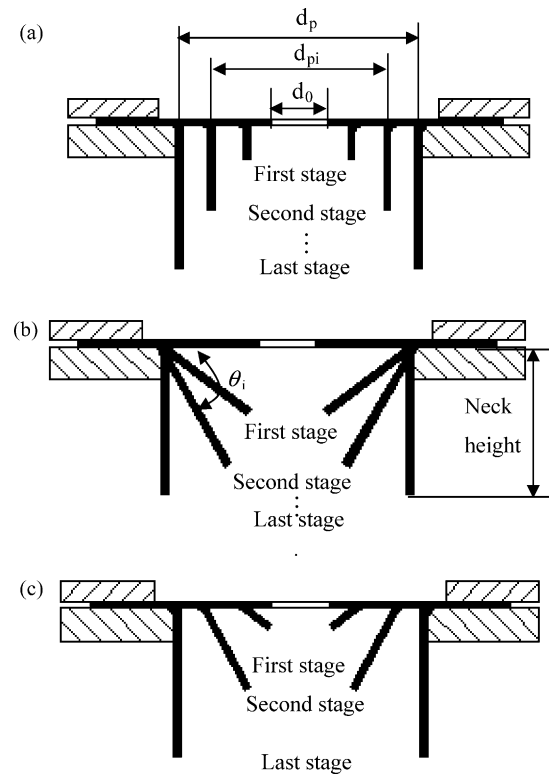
Three tool paths are used in incremental hole-flanging process.
